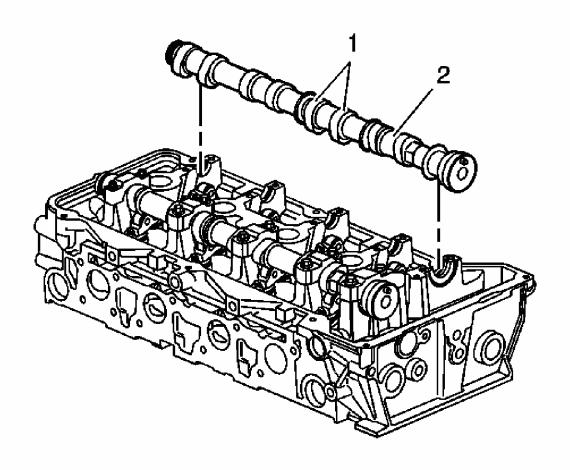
View of Camshaft Lobes & Journals Courtesy of GENERAL MOTORS CORP.
